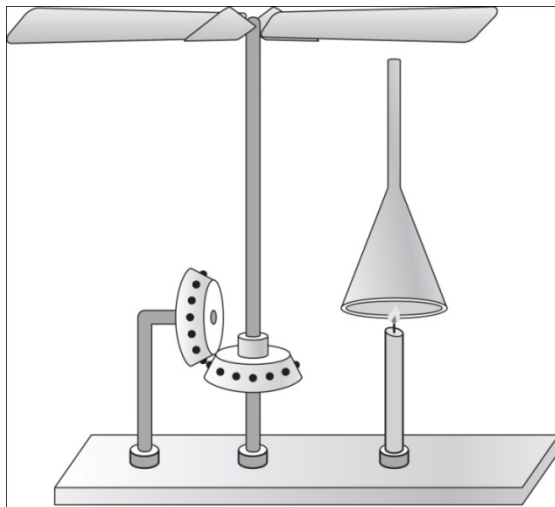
Concept II of machine shop kit: A flame is used to heat a piston, which will be pushed out to turn a gear. At the same time that the piston is pushed out, another piston is being pushed up, which will push the hot air piston back to its original position.
